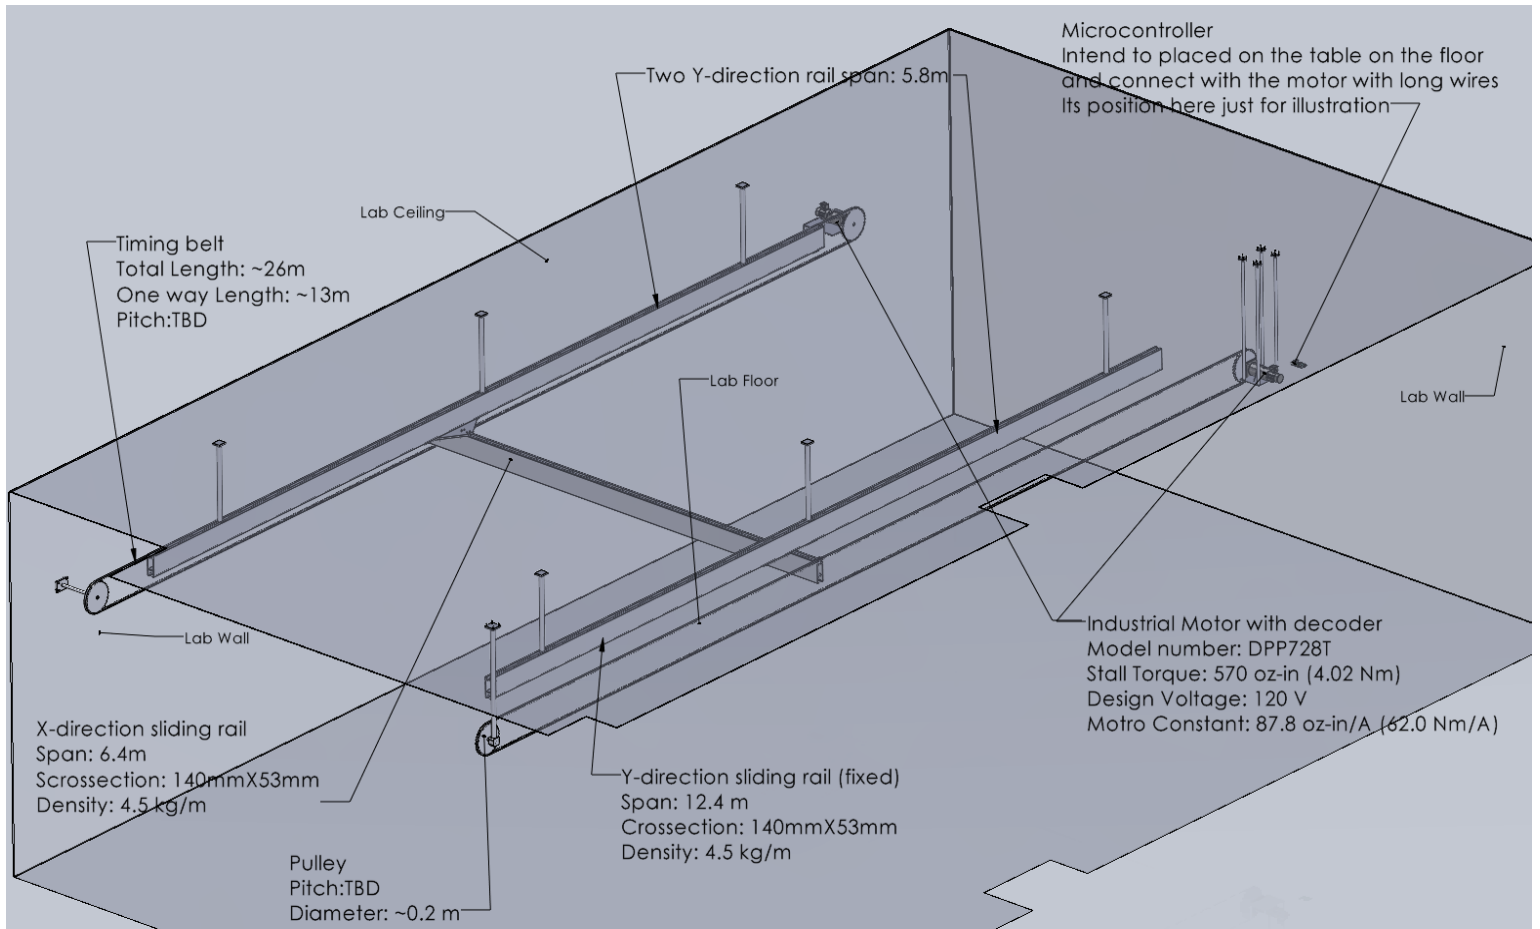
The picture of the detailed final design taken from CAD Solidworks showing various dimensions of different parts.
